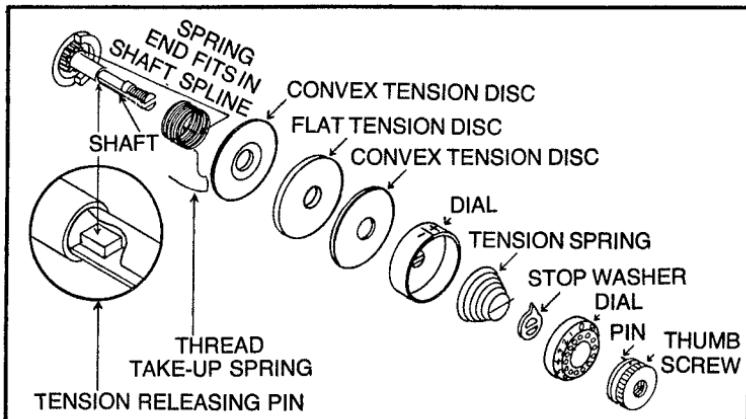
This drawing shows the upper tension regulator disassembled on the Singer Model 319W. The thread take-up spring, or the thread check spring, is inserted so that the spring end fits in the appropriate spline to create a slight tension when the thread pulls the spring counterclockwise. The appropriate spline might have to be found by experimentation. The tension releasing pin, shown in the enlarged view, releases the tension of the tension spring when the presser bar lever is raised. The thread tension can be correlated to the numbered dial by depressing the numbered dial while screwing on the thumb screw, and when the actual tension corresponds to the number on the dial, engaging the thumb screw pin in the appropriate hole in the numbered dial.
